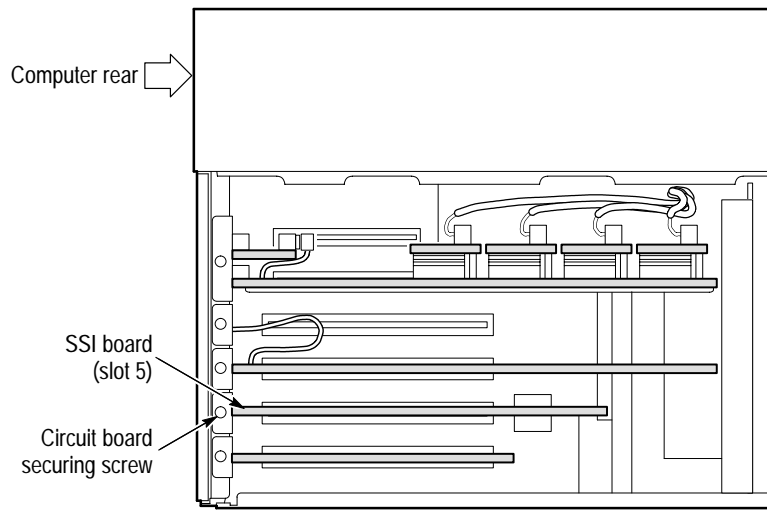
Top view of the Proliant computer (MTS215 shown) showing SSI board location
